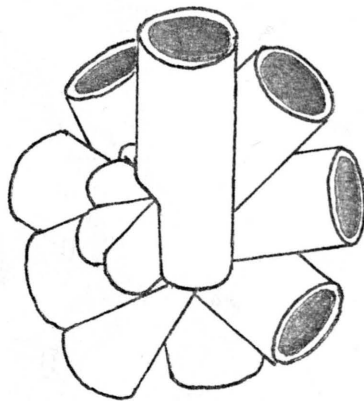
Welded pipe reducers. The reducers were welded together in this configuration.
